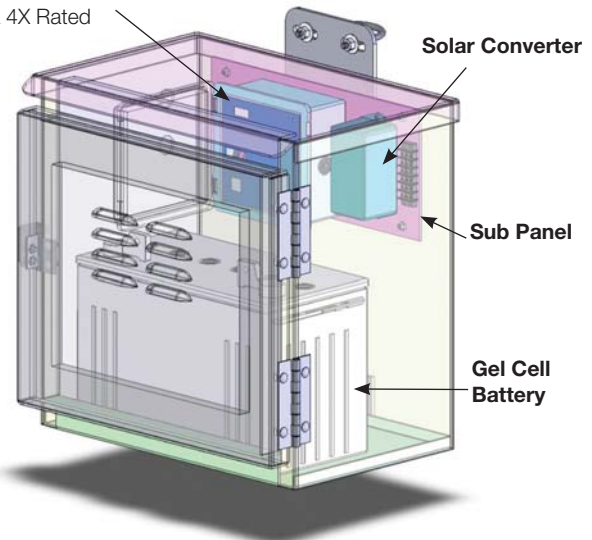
Enclosure: Battery, Motor Controller, and Solar Converter
